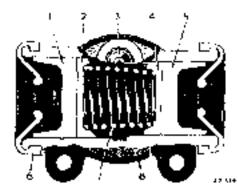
Brake Wheel Cylinder (Assembled View) (1942 Model, Typical of 1936-41 Models)
